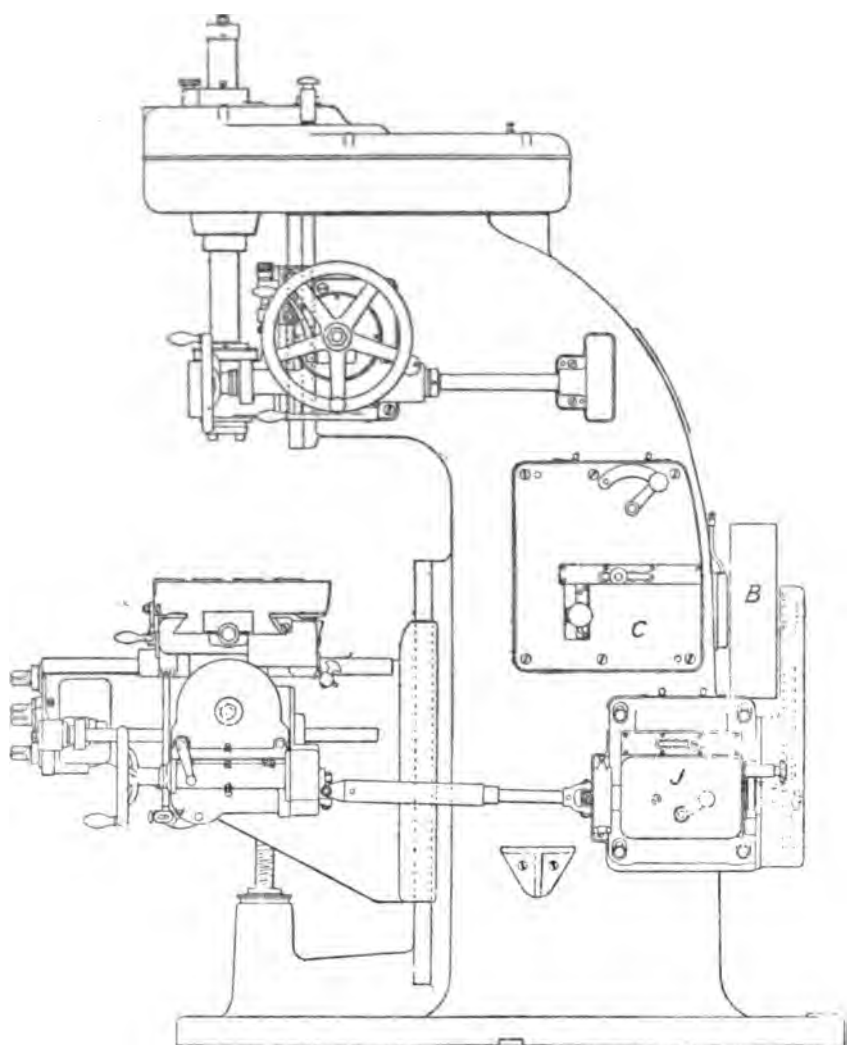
Side Elevation of Vertical Spindle Machine.
